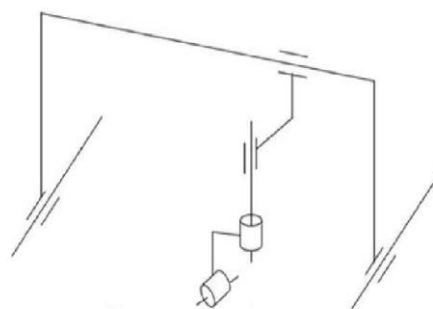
Joints diagram of laser welding robot for solar panel busbar
